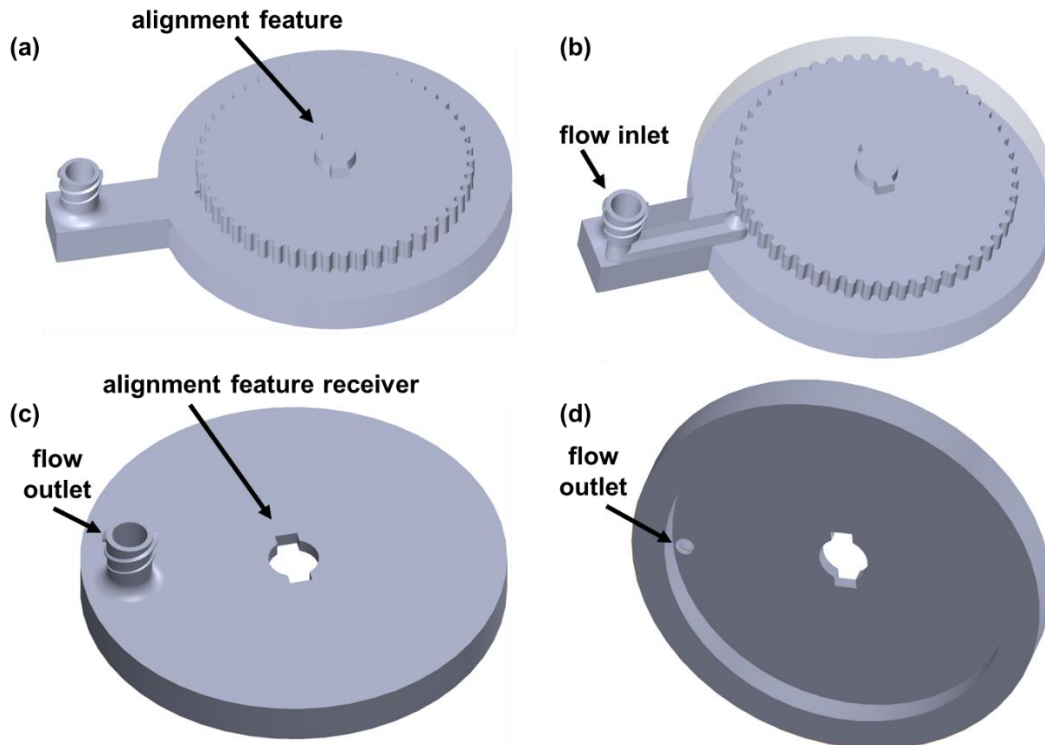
(a) Part A of the single-belt mold, (b) partial transparent view of part A displaying the routing of resin from the Luer lock connection to the belt, (c) top view of part B of the single-belt mold, and (d) bottom view of part B of the single-belt mold.
